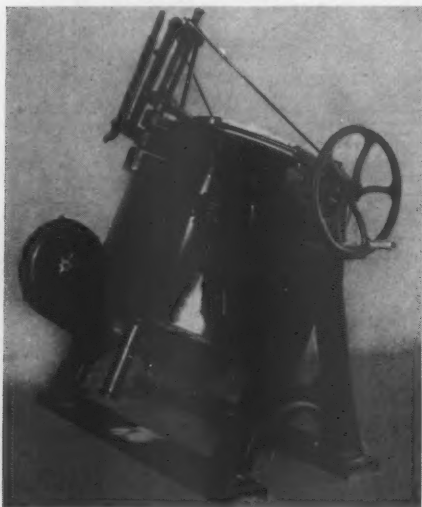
TILTING TYPE CRUCIBLE FURNACE USING COKE FUEL WITH FORCED DRAFT. (ILLUSTRATION, COURTESY CRUCIBLE FURNACE CO.)
